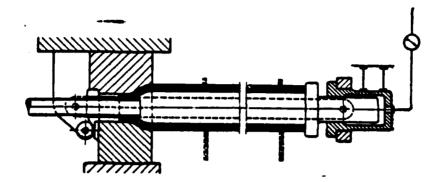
Schematic of the pricking of bottle on the hydraulic press in the shaped faces.
